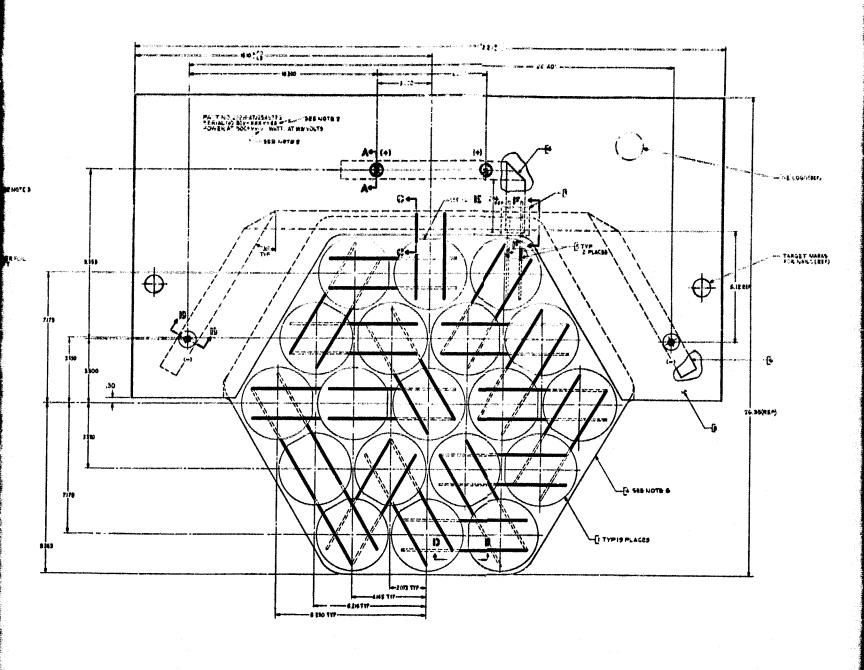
Assembly Drawing of the "Third-Generation" Shingle Solar Cell Module
